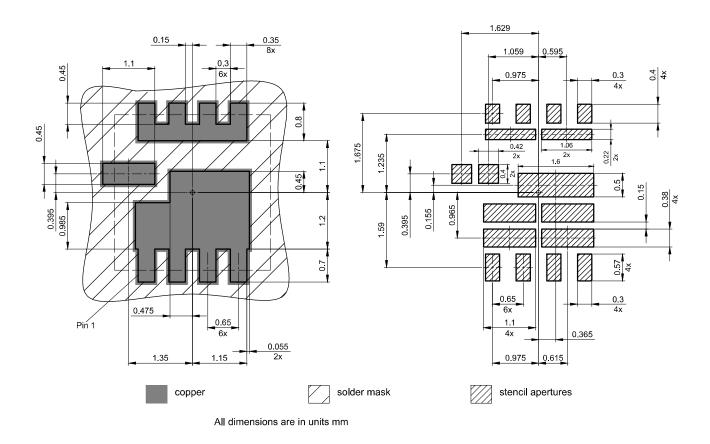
Outline Boardpad (PG-TTFN-9-1), dimensions in mm
